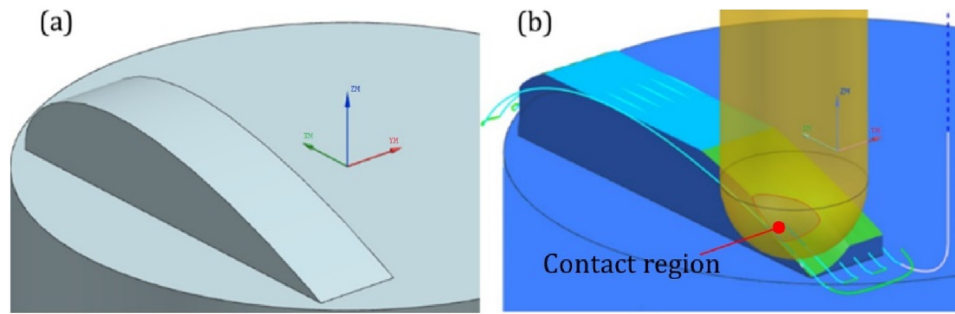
(a) CAD model of the freeform surface; (b) CAM simulation and tool-workpiece contact region.
